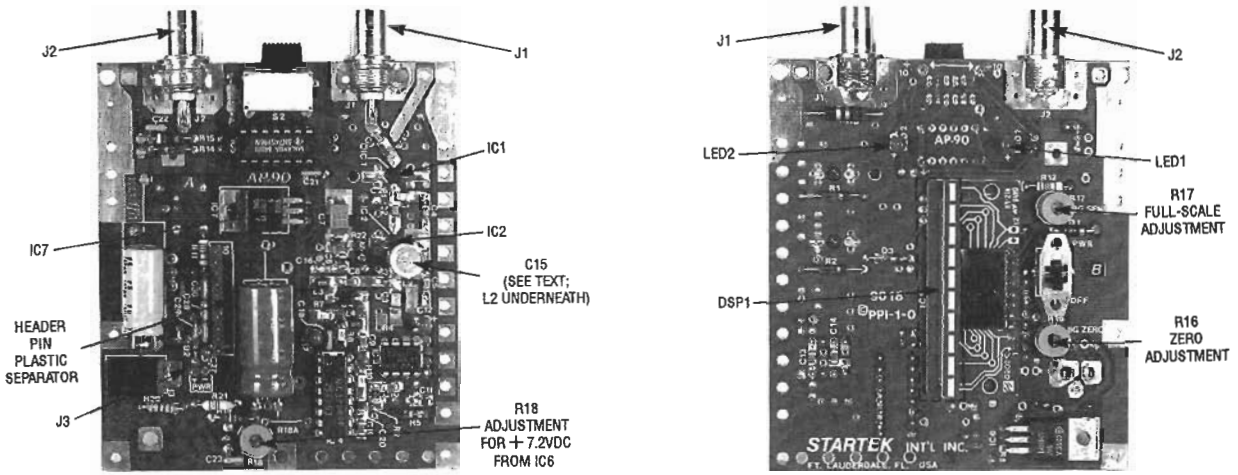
PROTOTYPE OF THE CABINET-MOUNTED version; side A appears in (a), side B appears in (b). The header pins protrude through from side A, and are soldered to DSP1 using the bottom 10 pin holes on the display PC board.
